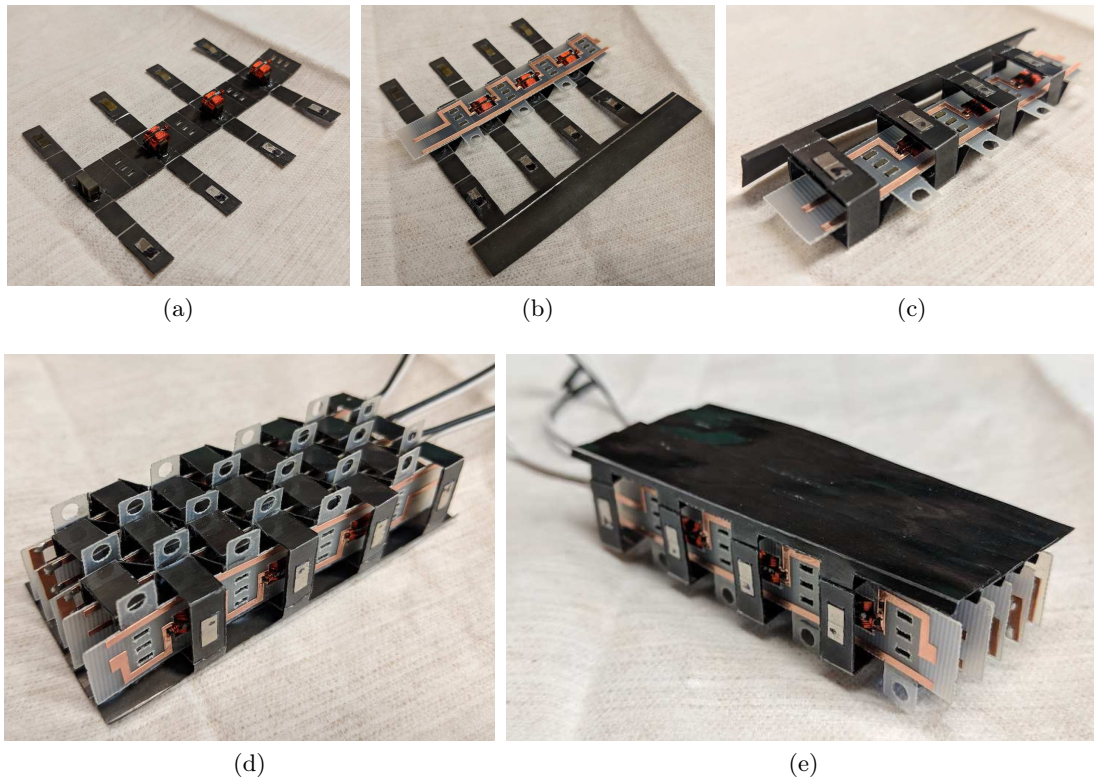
Assembly steps. A) Populate wound cores, magnets, and back-iron components, B) Apply electrical routing and skin strips to constrain corrugation hinge angles, C) Bring magnets and back-iron components together to complete flexure bearing, D) Multiple row units are stacked, E) Skin strips lap and are joined into a continuous aerodynamic skin.
